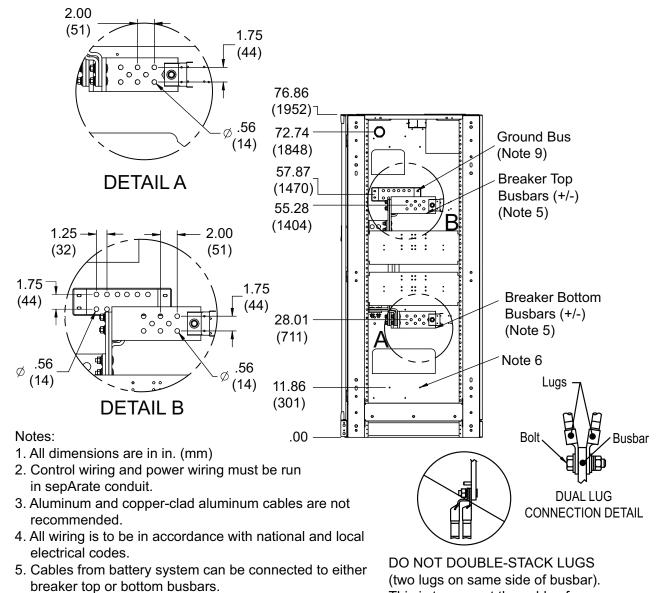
Terminal detail drawing, Liebert Module Battery Disconnect
